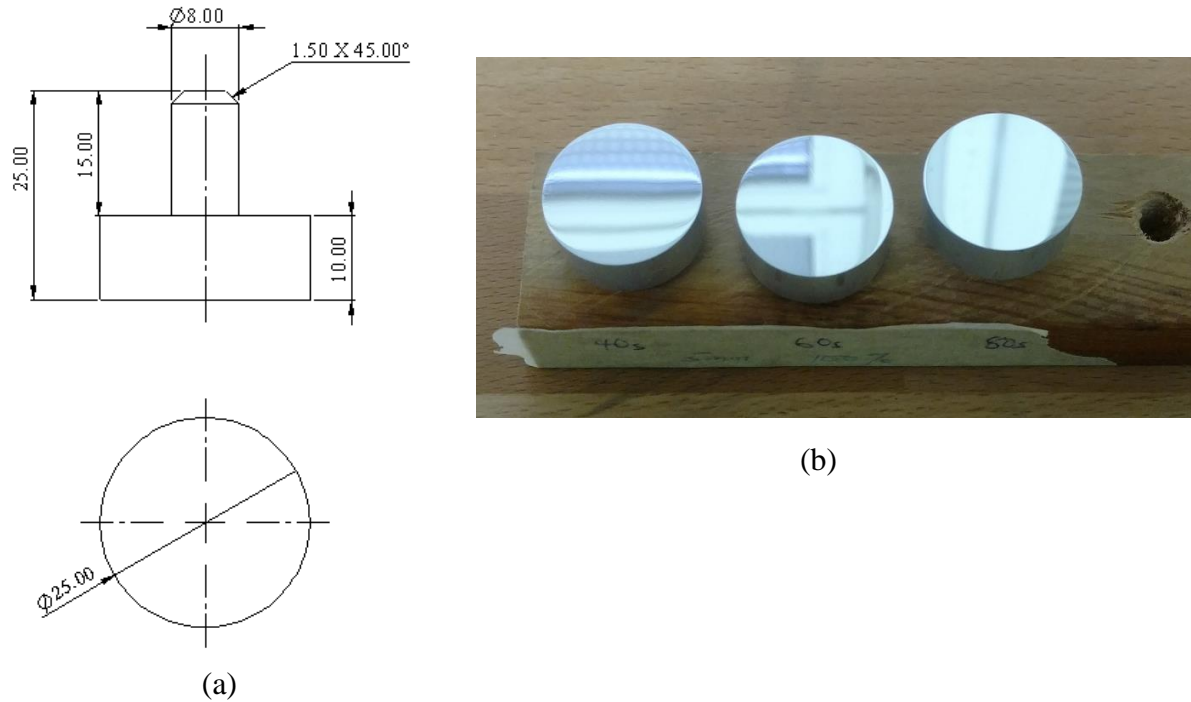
(a) Drawing of the test sample with dimensions, (b) Test sample placed in a sample holder
